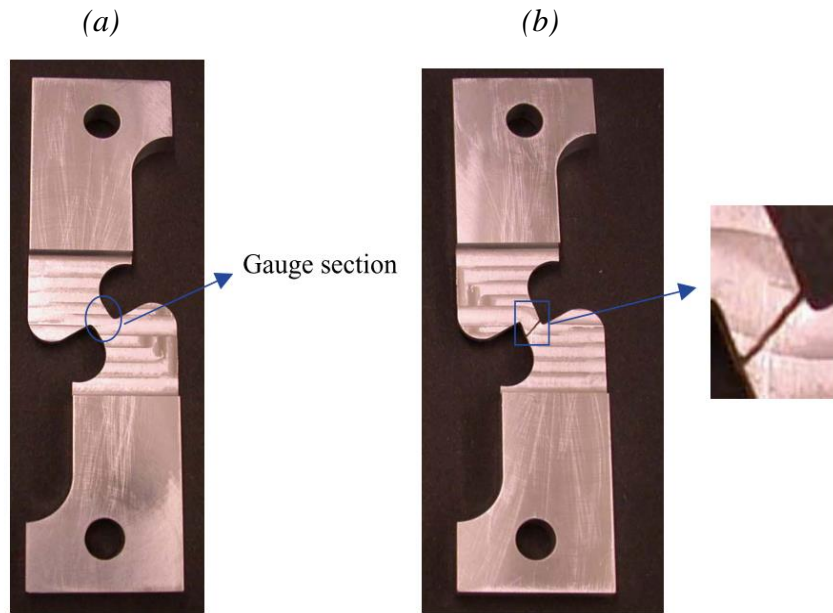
Pure Shear Specimen, a) Undeformed Specimen, b) Fractured Specimen, adopted from Bao and Wierzbicki [12].
